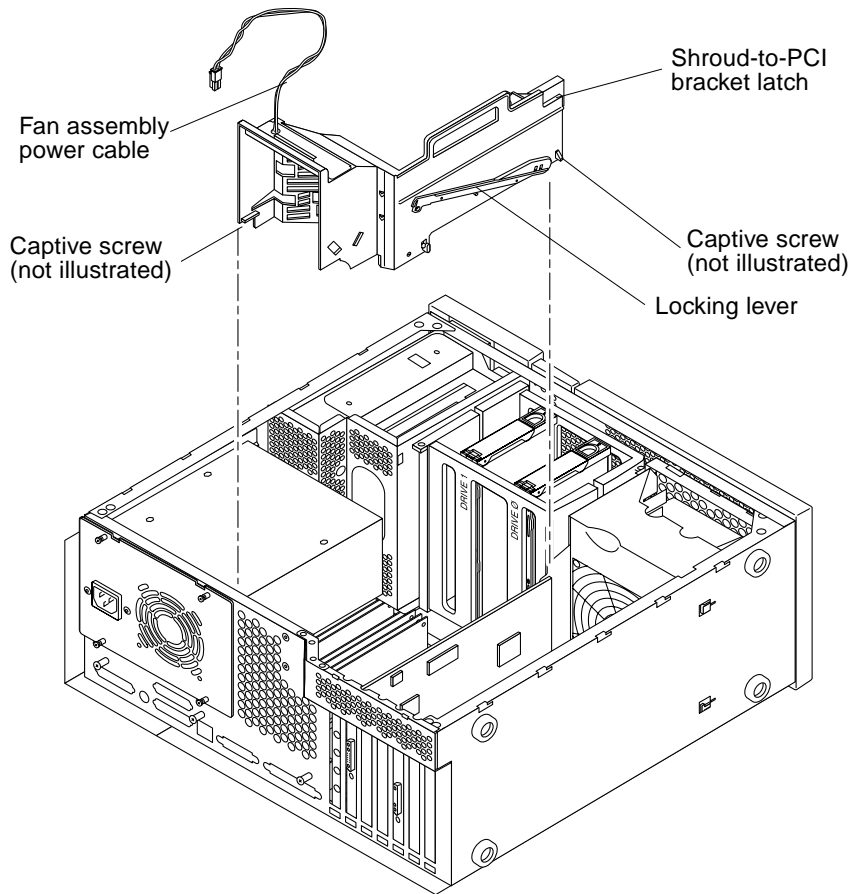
Removing and Replacing the Two-Piece Shroud Assembly
